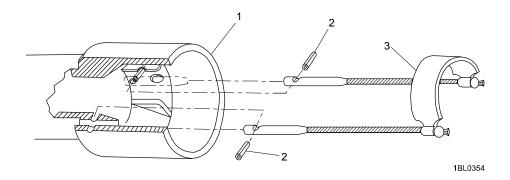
Additional Authorized Equipment, Extension Assembly, PN 11833481
